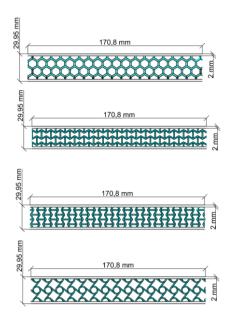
Sandwich beams geometry. Wall thickness – 1 or 0.6 mm
